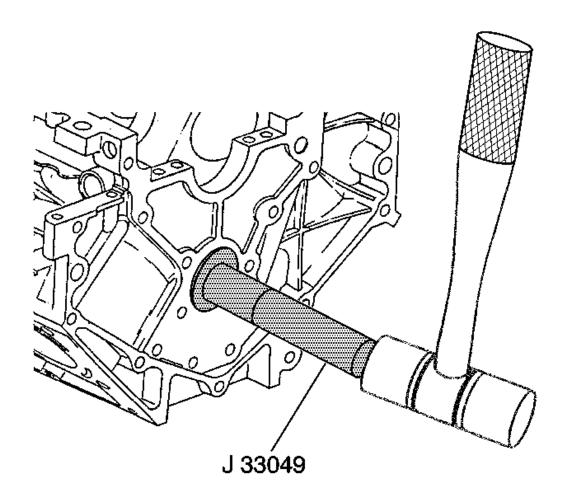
Driving Bearing From/Into Block Bore Courtesy of GENERAL MOTORS CORP.
